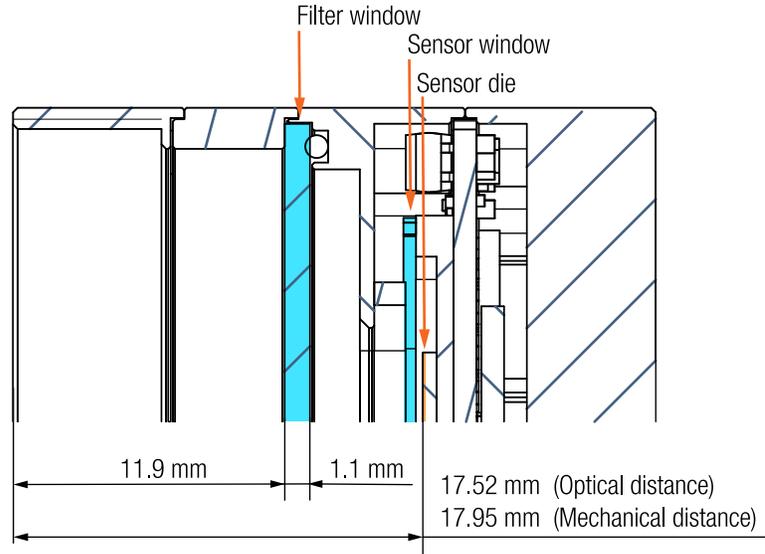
Cross section of MQ013xG-ON-S7 camera models
